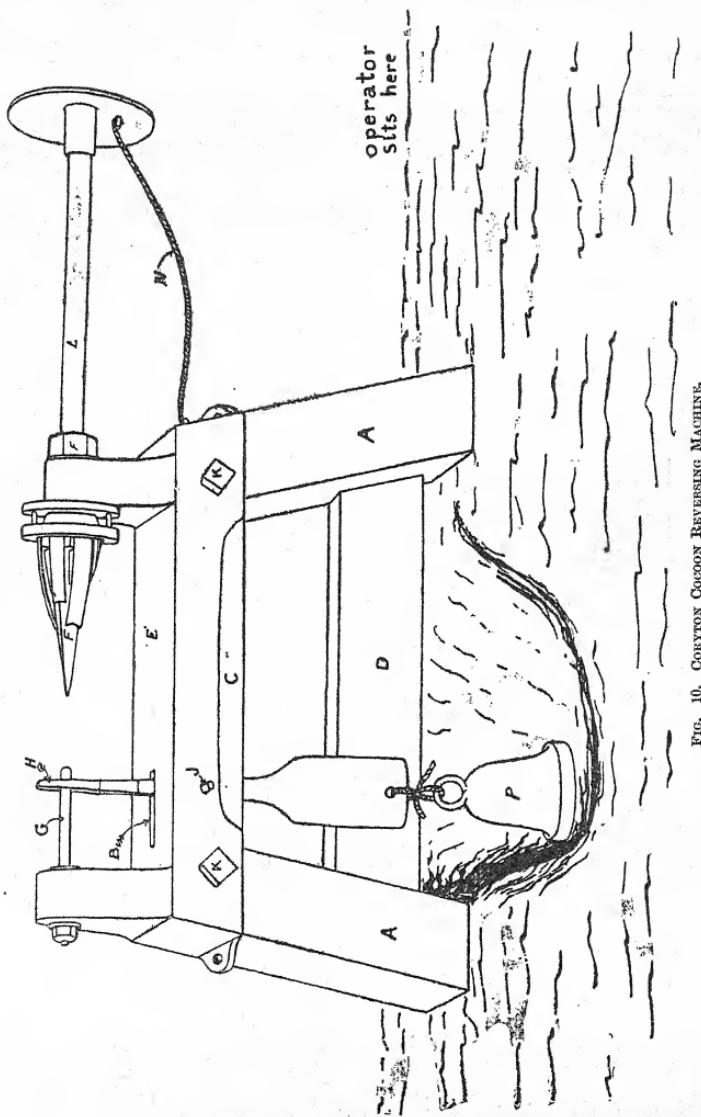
CORNTON COCOON REVERSING MACHINE.
